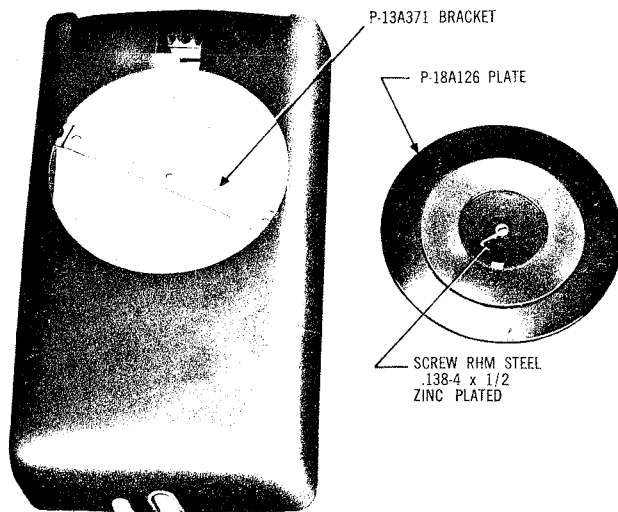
554-Type Housing with 95B Apparatus Blank, Exterior
